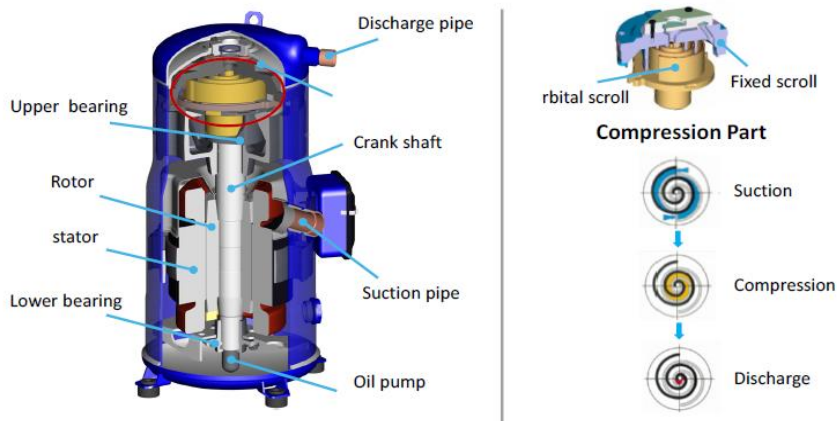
Rotary-scroll compressor (a) Cut-section (b) Theory of operation
